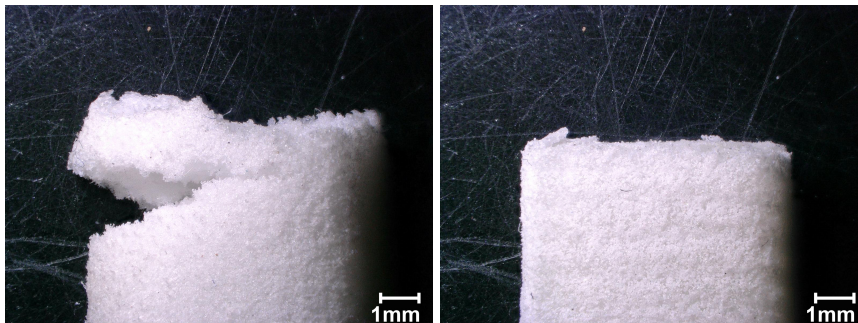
Fracture profiles of a glass bead filled PA12 samples produced by LS in the x-direction (left) and z-direction (right) after fatigue testing
